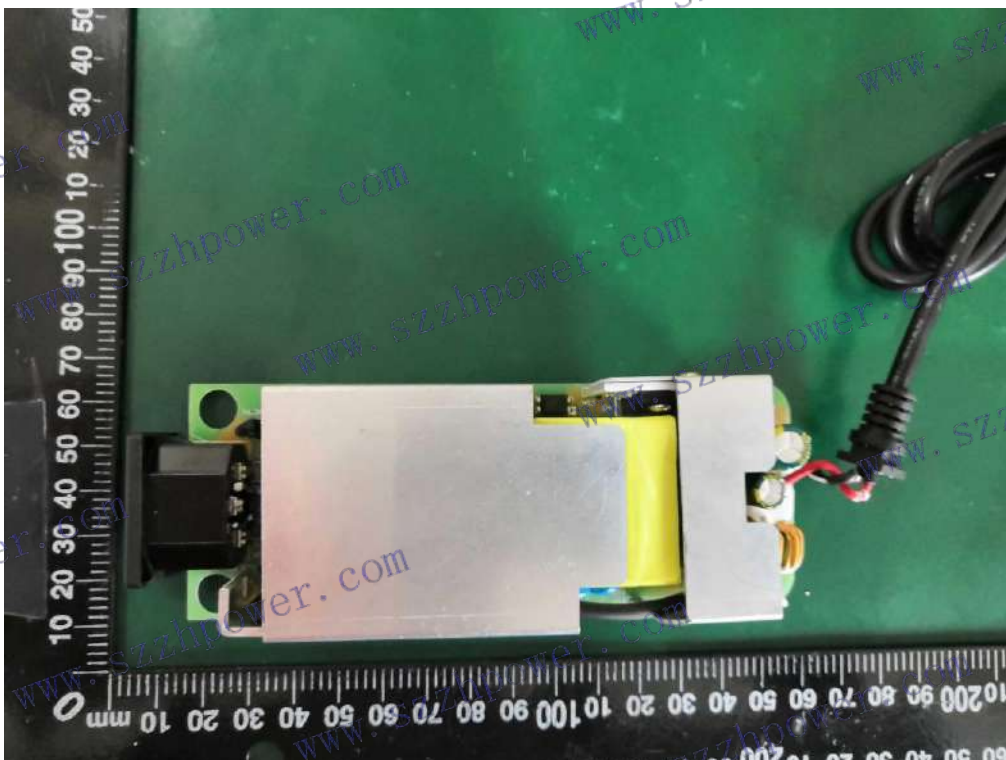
Top view of PCB for models ZH100DU-xxxxyyy, KS100DU-xxxxyyy
